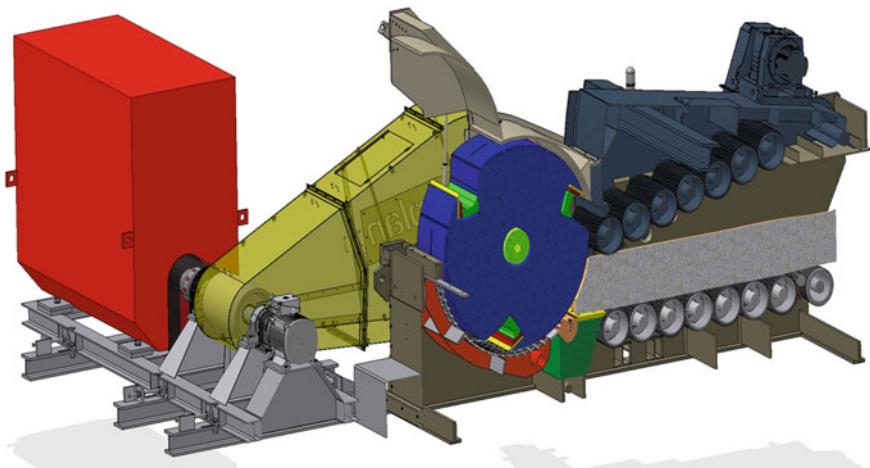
Section through a drum chipper by Vecoplan, with motor, continuously arranged knives and feed rollers [3]
